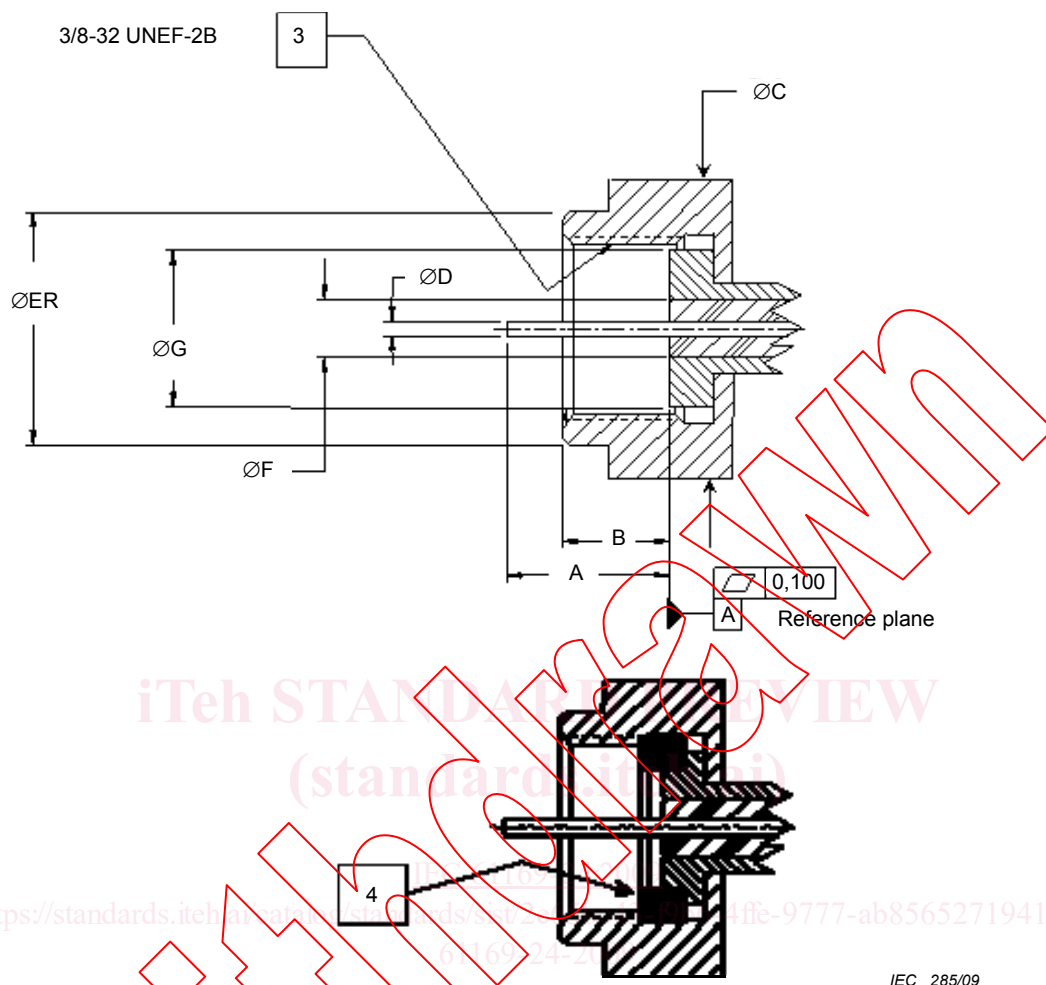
Connector "F" type male plug (indoor) (for dimensions, see Table 2)
